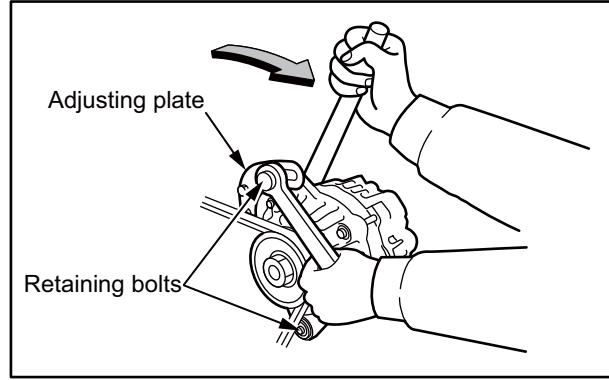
Belt and belt tension - Inspect and Adjust
